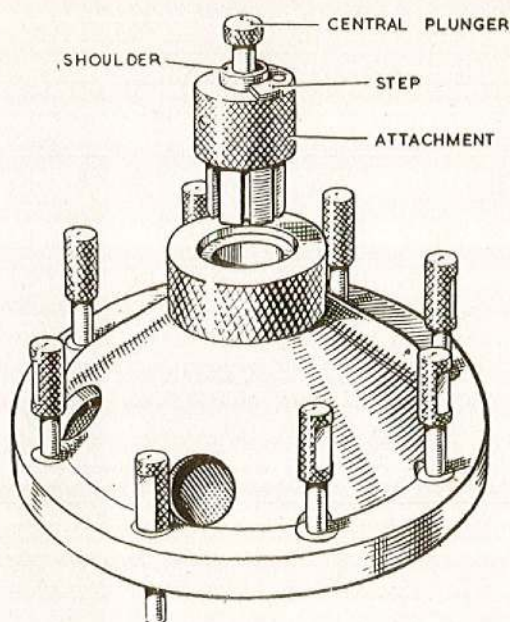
Concentricity gauge-G.46439, with attachment, for pump housing and quill shaft
